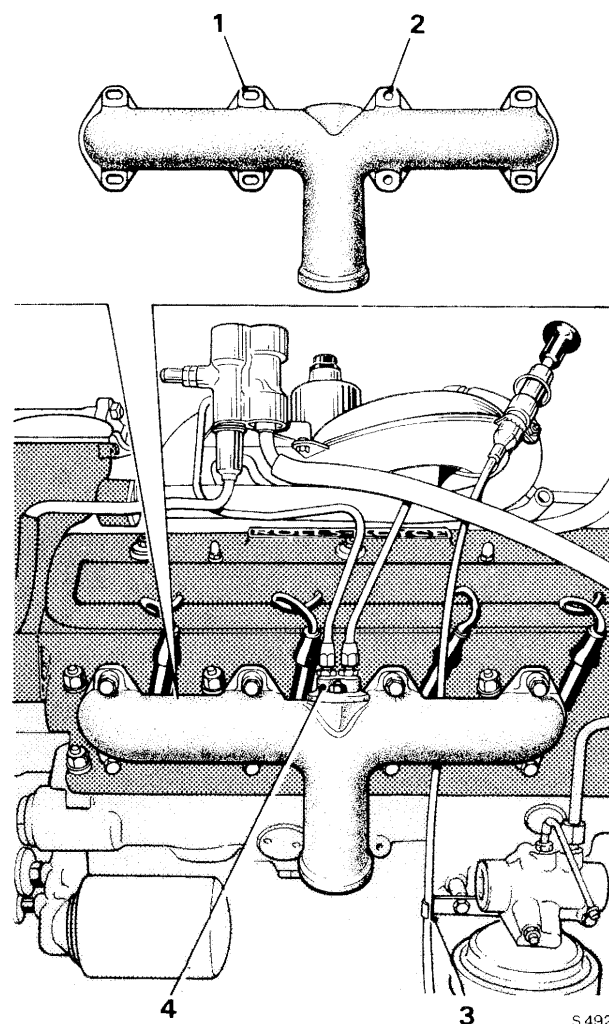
'B' BANK EXHAUST MANIFOLD WITH CENTRE OFF-TAKE
